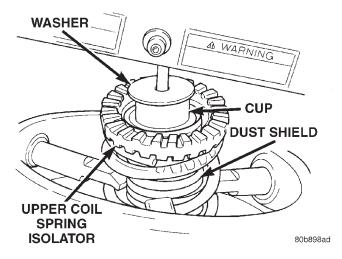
Upper Coil Spring Isolator, Washer And Dust Boot
